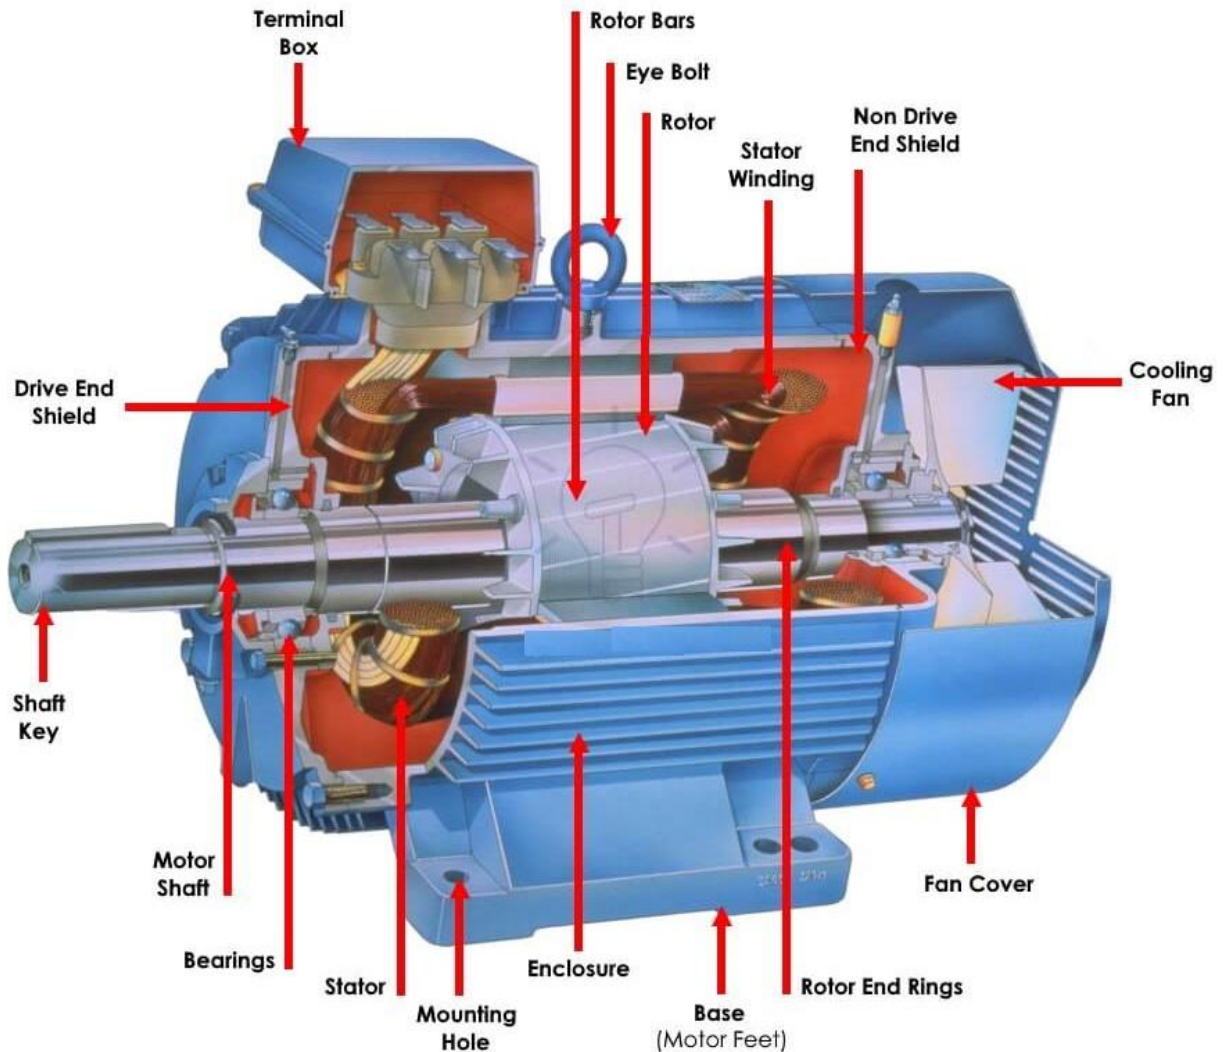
Sectional view of overall of squirrel cage induction motor
